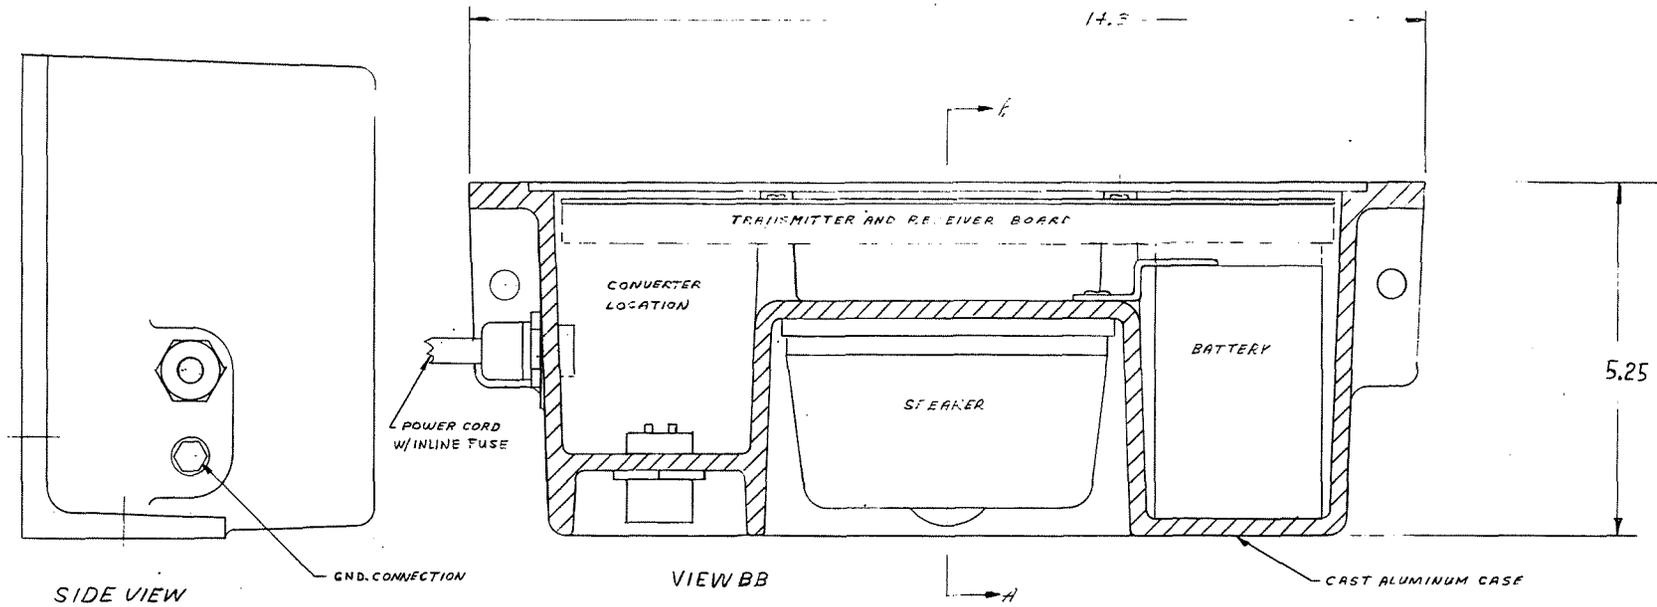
REPACKAGED COMPONENTS MOUNTED IN HANDSPEAKER HOUSING
